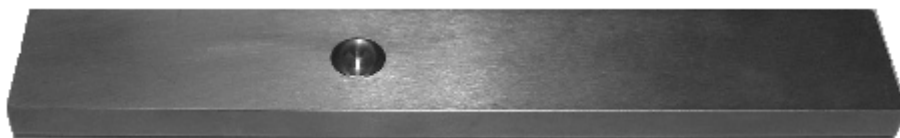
Photograph of rectangular bar sample (130x7x21mm), showing the hemispherical dimple in the rear face. Cracks were generated on the face opposite the hemispherical dimple by cyclically loading the samples in 3-pt bend on a resonance fatigue rig.
